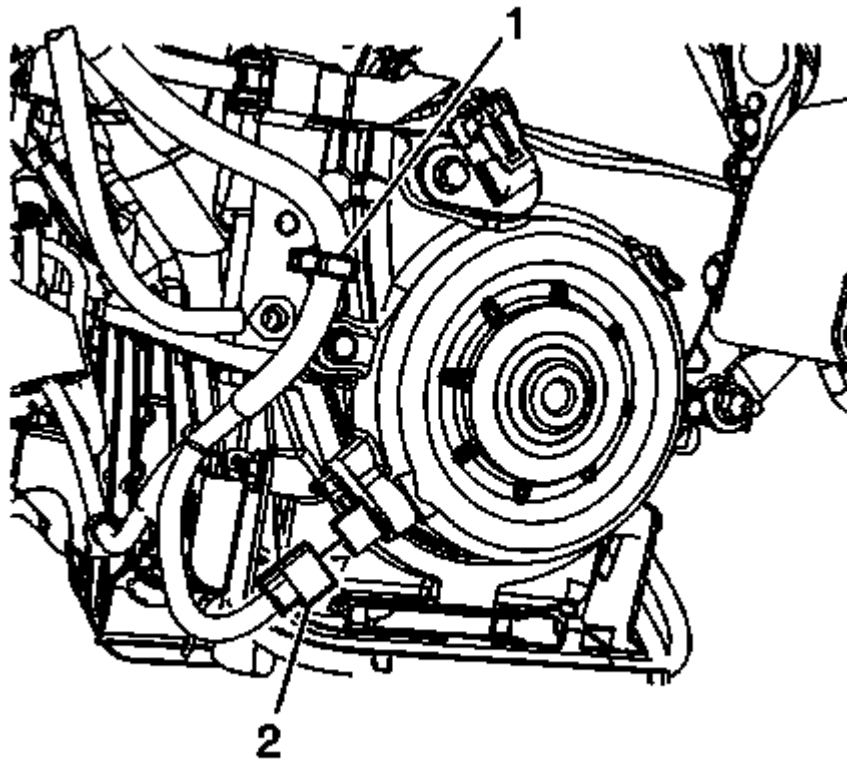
Identifying Crankshaft Position (CKP) Sensor Electrical Connector & Clip
